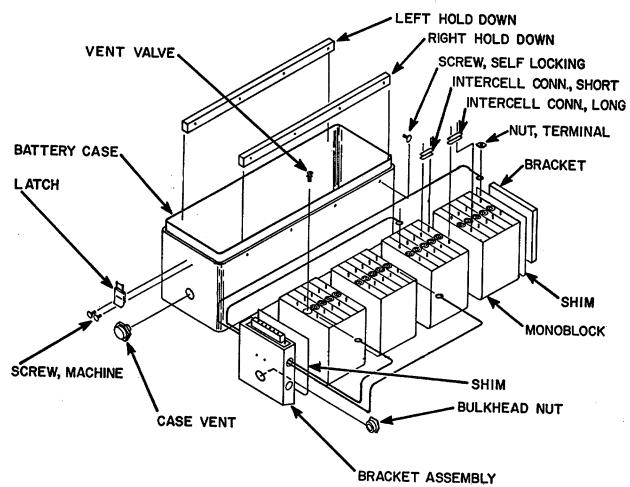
Battery, Storage BB-651/U, Exploded View
